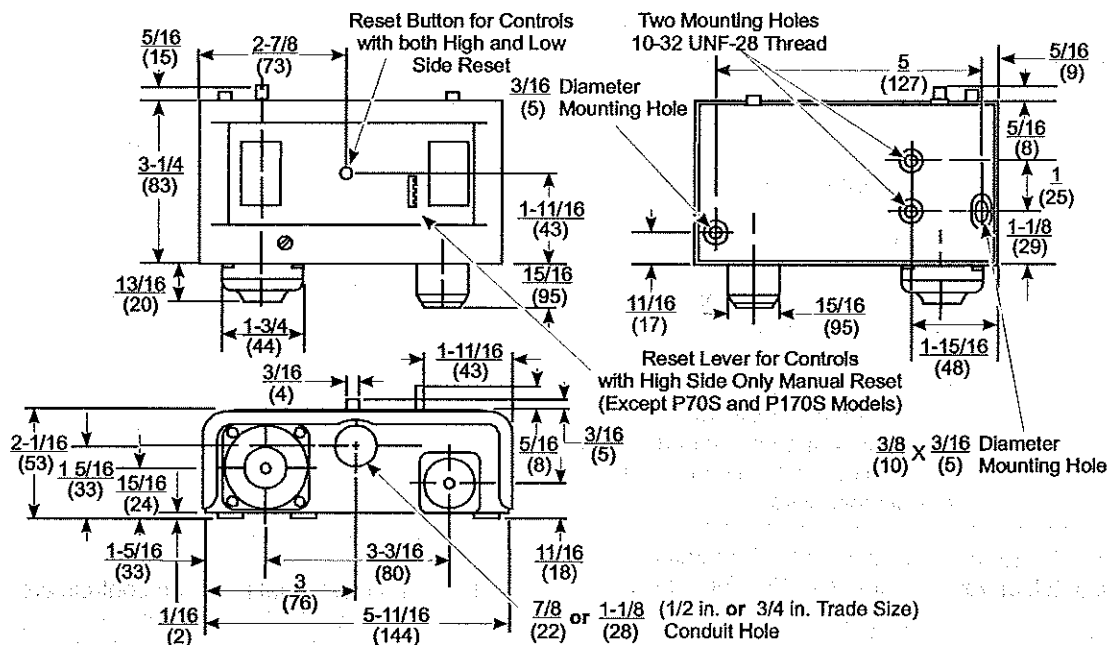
Dimensions for P70, P72, and P170 Dual Pressure Controls with NEMA 1 Enclosure, in. (mm)
